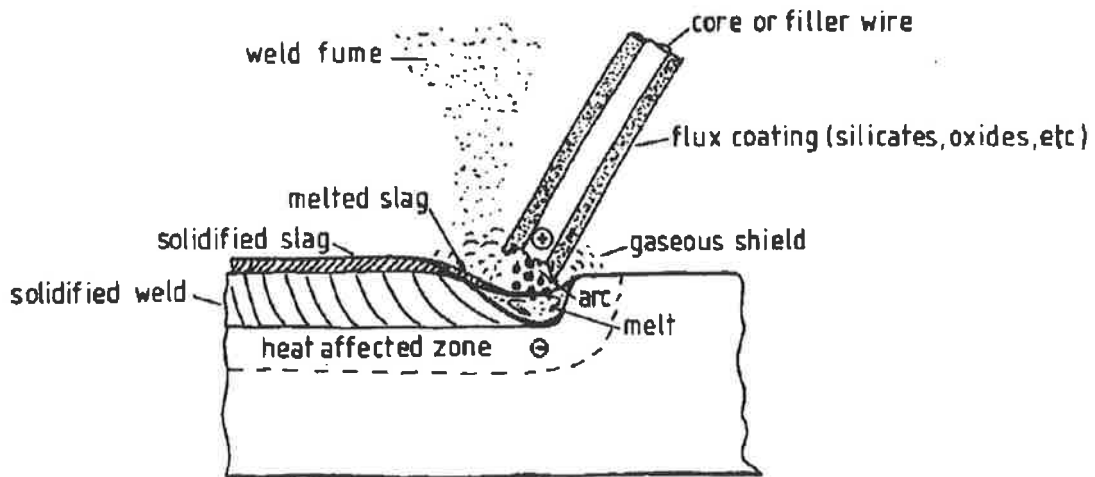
Schematic illustration of Manual Metal Arc Welding (MMAW).
